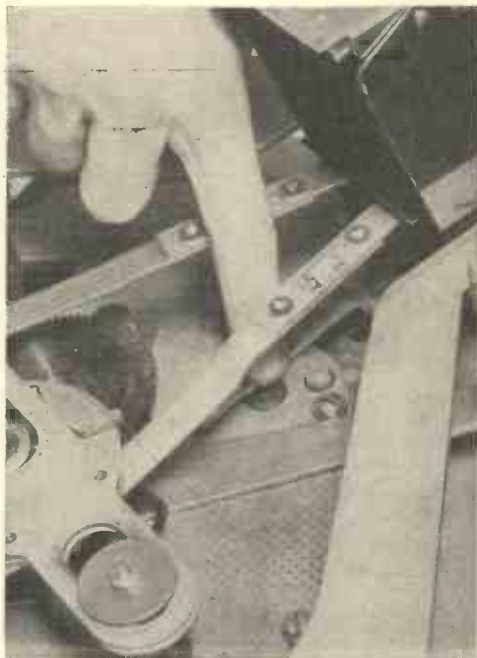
CONCEALED MOTOR SECURING SCREW IN "H.M.V." AUTOMATIC MECHANISM.
